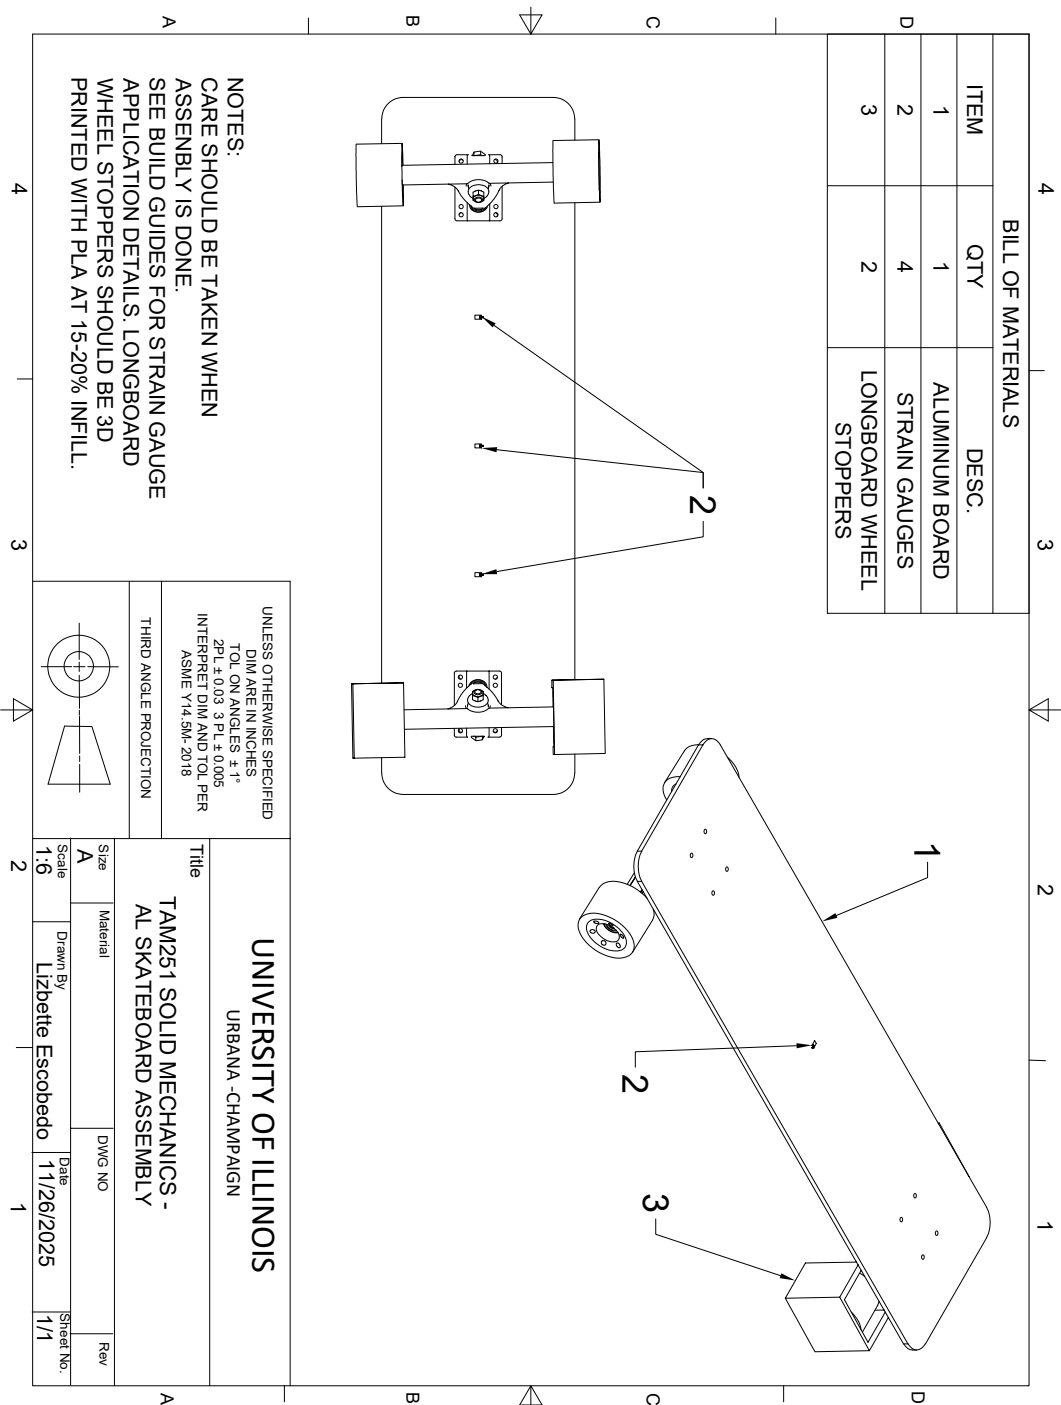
Solid Mechanics Demonstration: Assembly Drawing
